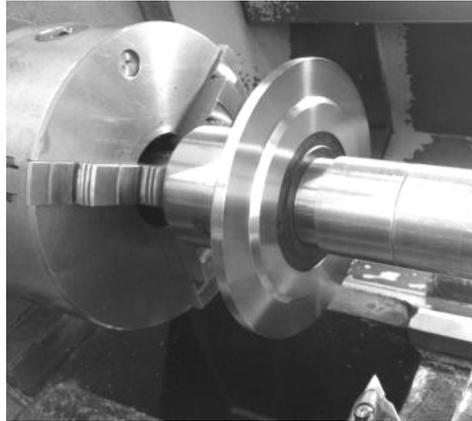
Turning of part made of hardened cold work tool steel. Application: roller of roll forming machine
